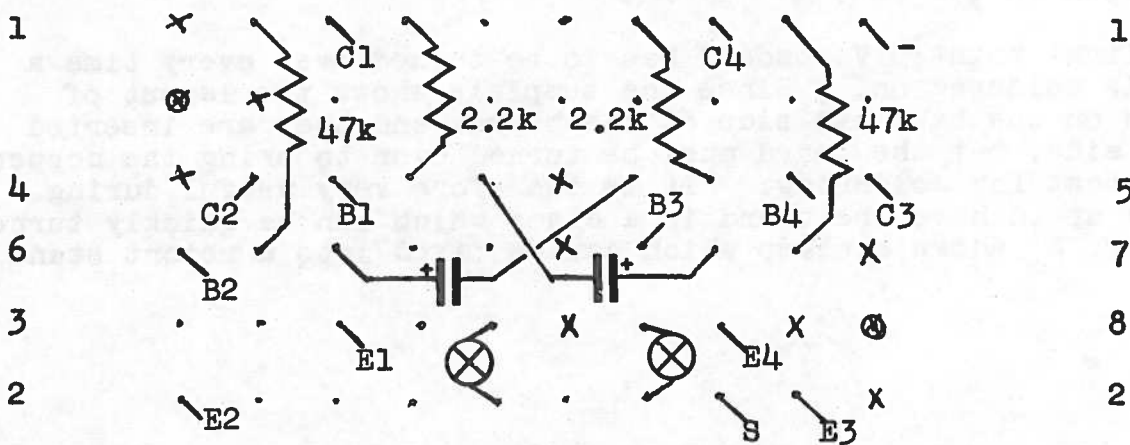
Wiring template for Veroboard. Connecting strips run horizontally in this diagram. Holes marked x are partially drilled out to break the copper strip; those marked @ are completely drilled out for fixing bolts.
